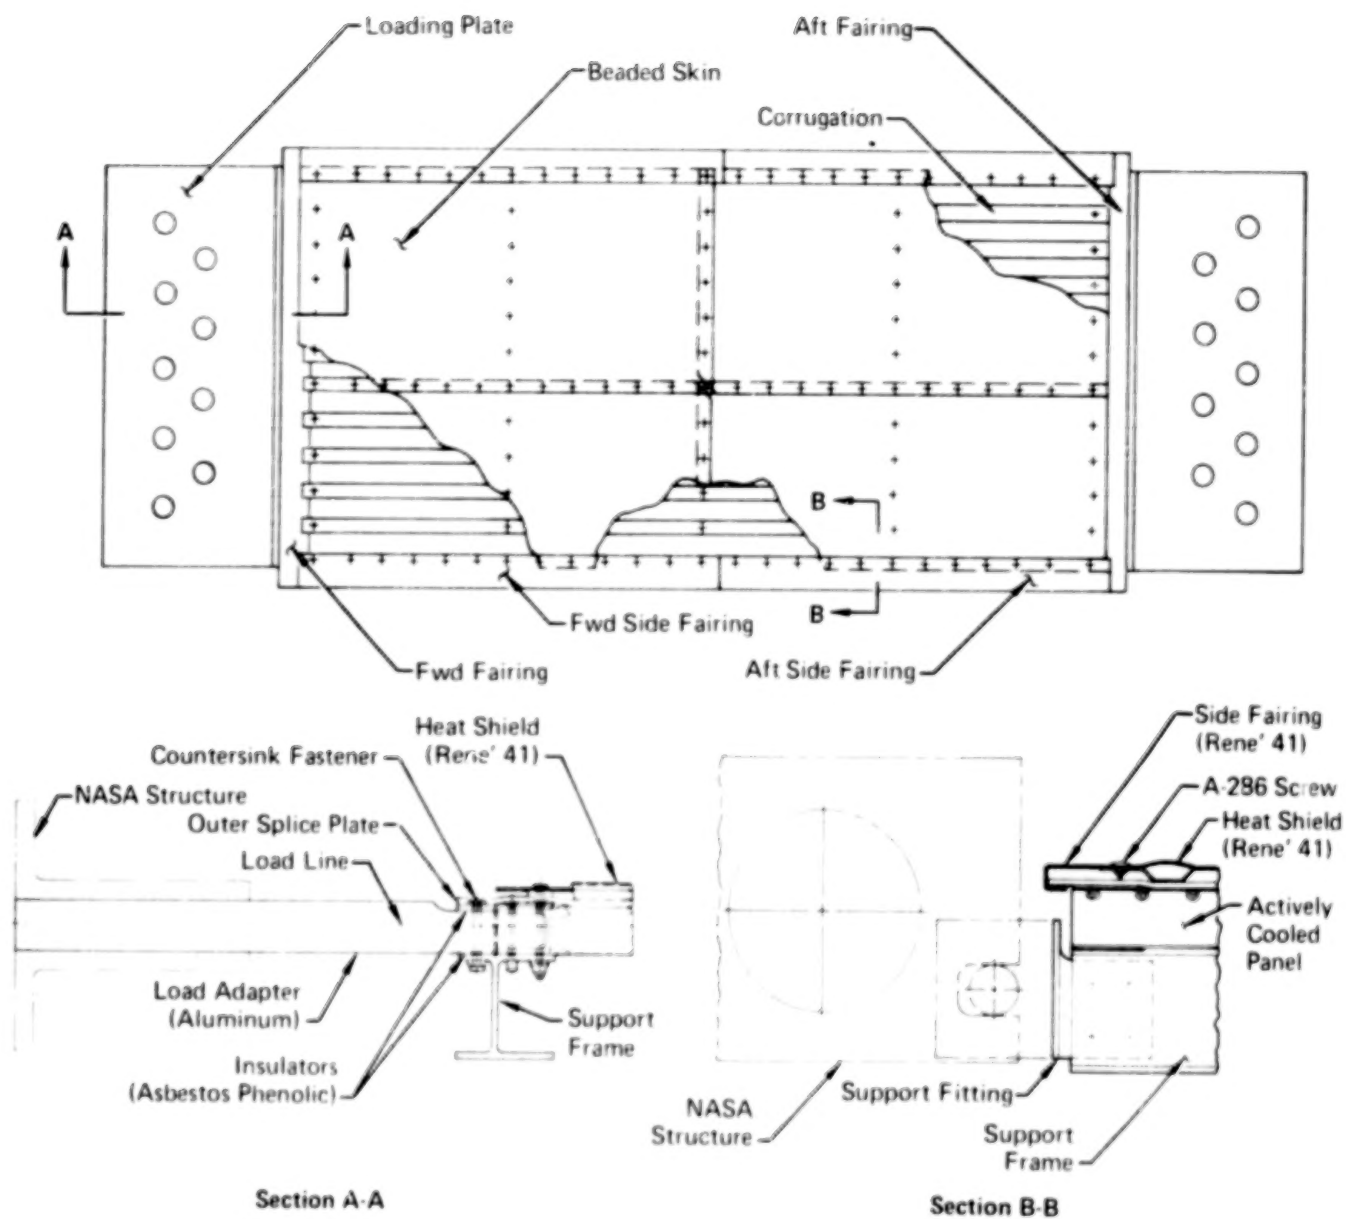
TEST PANEL RADIANT HEAT/FATIGUE/STATIC TEST SET-UP
